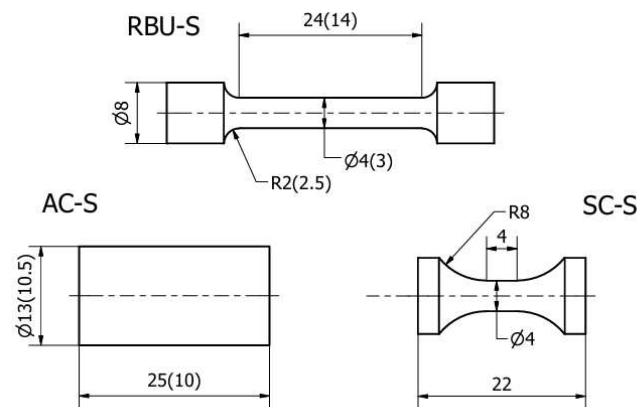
Technical drawing of sample for uniaxial tensile testing (RBU-S) and uniaxial compressive testing (AC-S and SC-S). Dimensions in brackets refer to the SLS samples. Dimensions are in mm.
